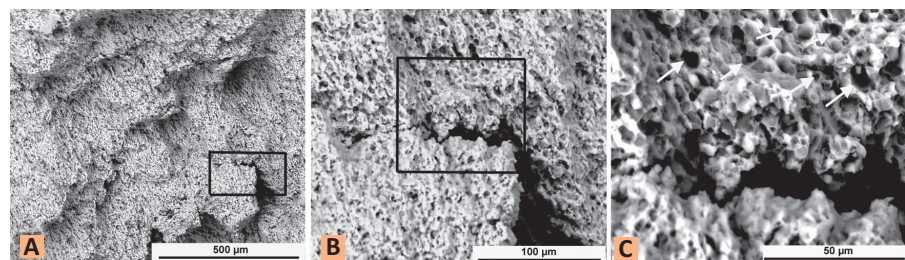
SEM of fracture tension sample: A — General view of the surface; B — magnified view of the propagated crack; C — dimple-like fracture surface.
